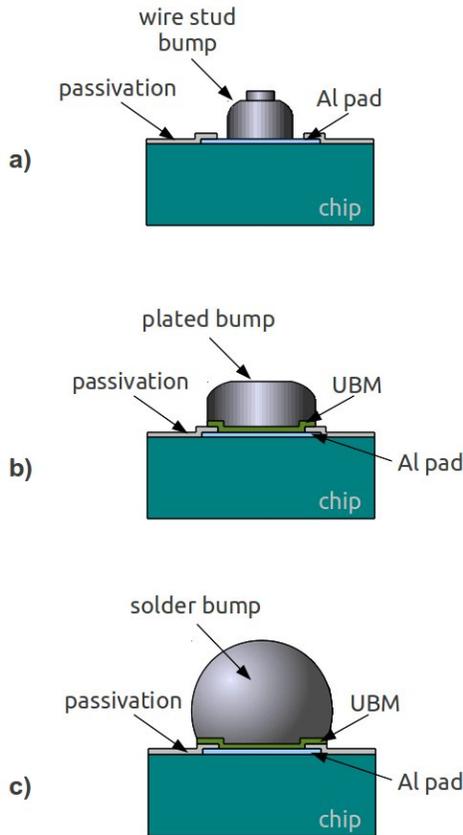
Flip chip bump: (a) wire stud bump; (b) plated stud bump; and (c) solder bump (After Baldwin D. F. [8])
